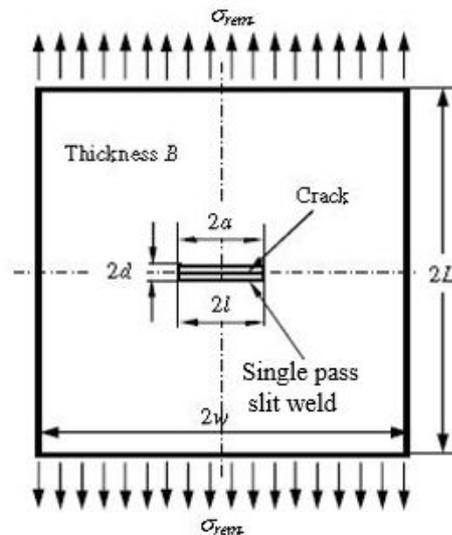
Geometry of a plate with crack in the slit-weld [6].
